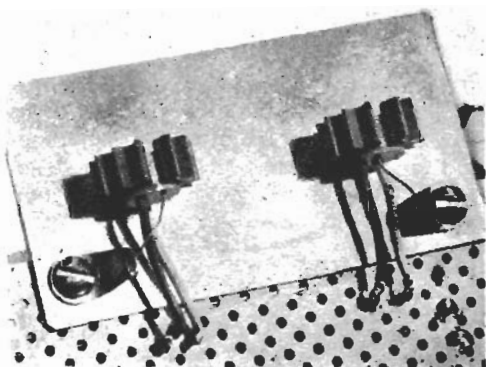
Photo shows how Q1 and Q2 are mounted on aluminum plate. Finned heat sinks are Motorola HEP-158. Collectors are connected to solder lugs.
